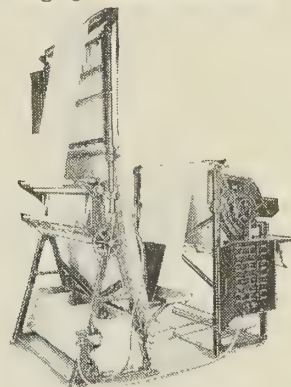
Showing Rolling-Up Device at Rear of Machine
